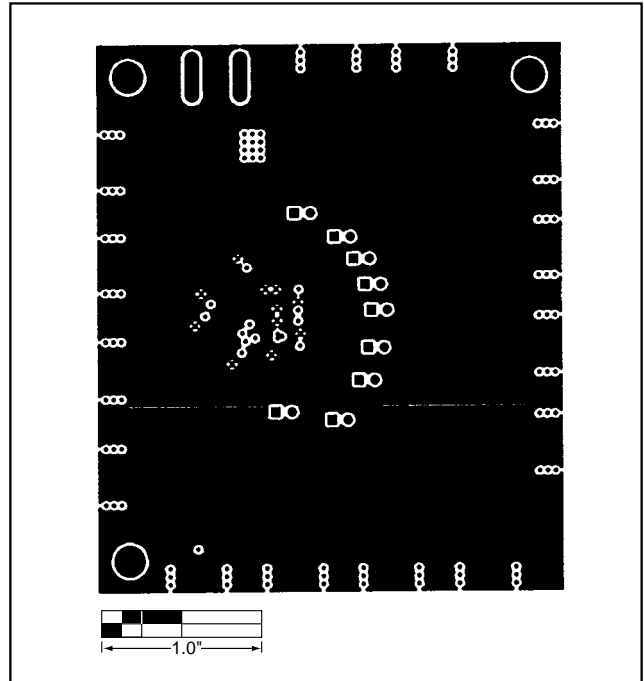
MAX3680 EV Kit PC Board Layout—Power Plane
